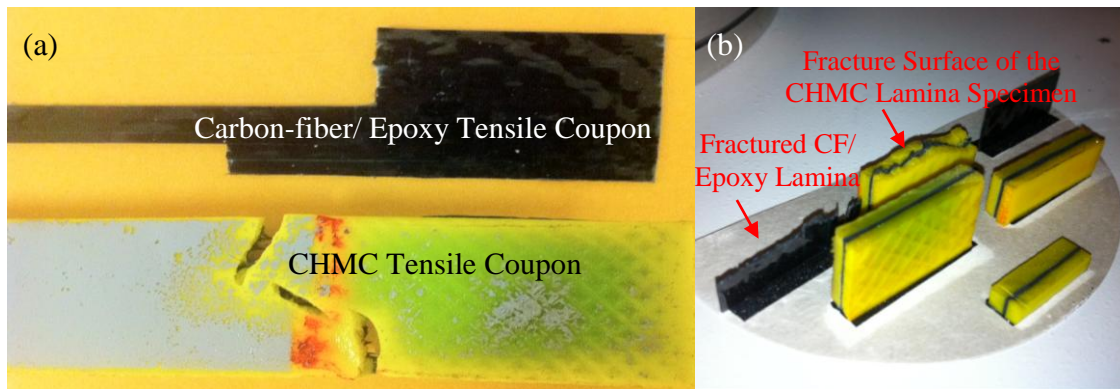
(a) Damaged tensile tests coupon specimens for carbon fiber reinforced epoxy and the CHMC; (b) Specimens used for fractography studies
